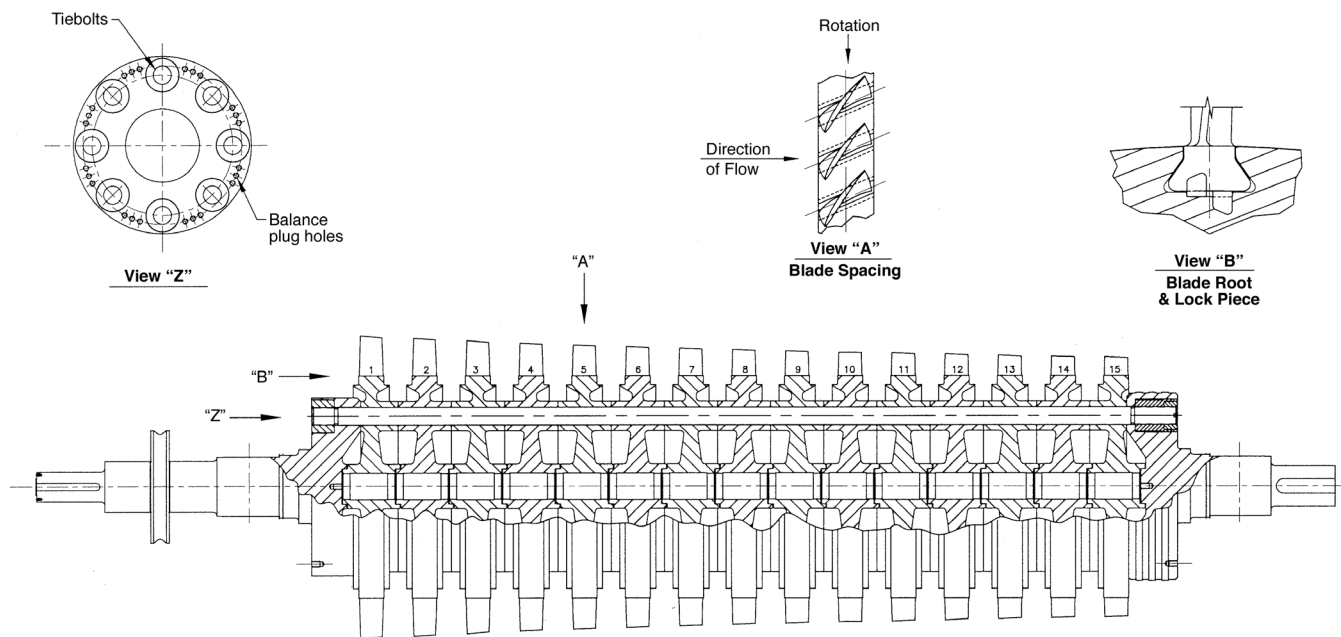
Axial Compressor Rotor Construction: Stacked Discs with Tie Bolts
